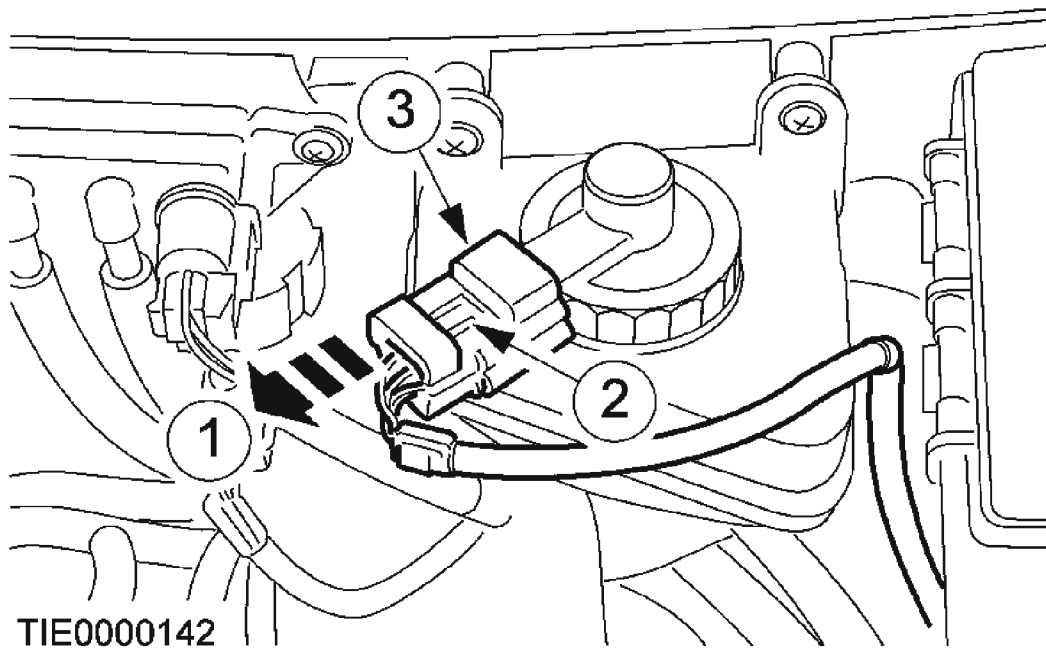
Disconnecting Low Brake Fluid Warning Indicator Switch Electrical Connector
